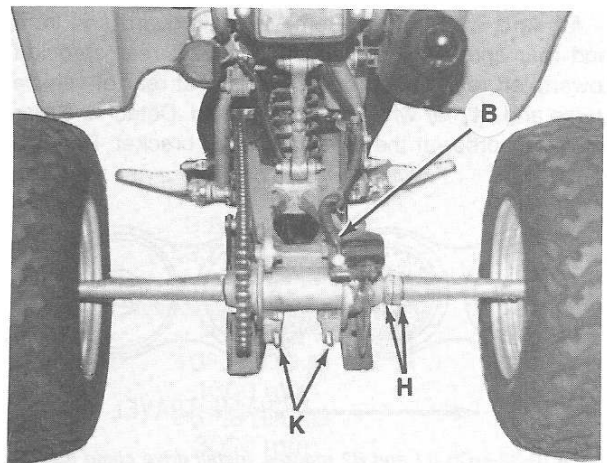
View identifying location of rear brake caliper bleed screw (B), rear axle nuts (H) and outer locknuts (K) on axle housing drive chain adjusters. Two adjusters, as shown, are used on B1 and B2 models and one adjuster, located on the left-side, is used on A1 and A2 models.
